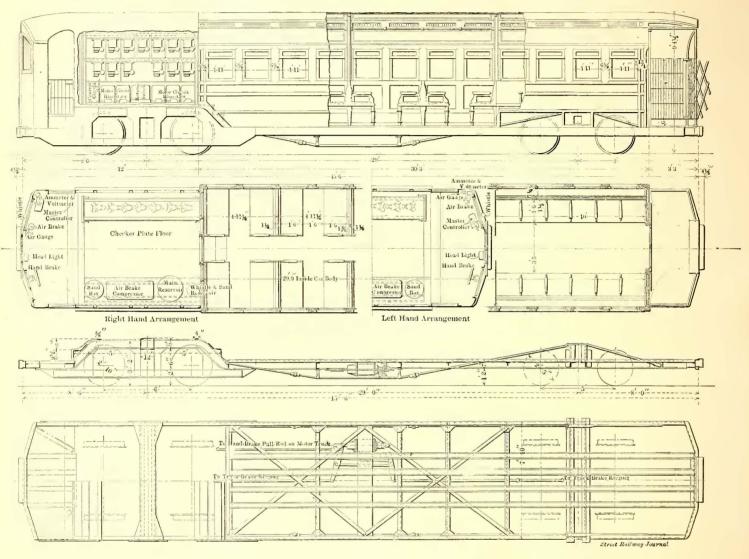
FIG I.-LONGITUDINAL SECTION AND PLAN OF CAR AND OF FLOOR FRAMING
